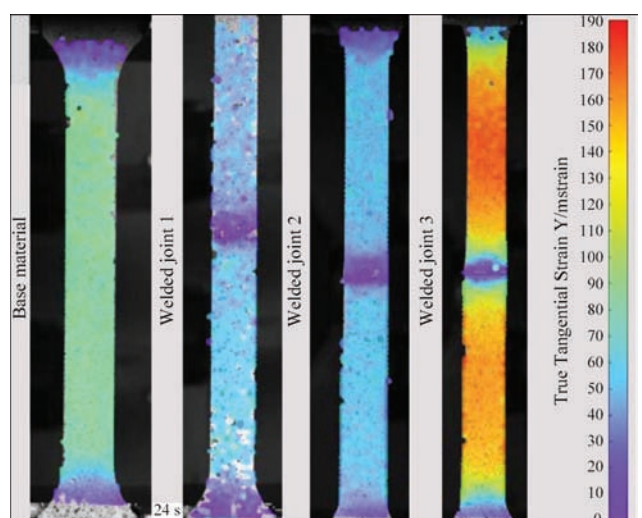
Strain fields in tensed base material and welded joint ($t = 24$ s)
